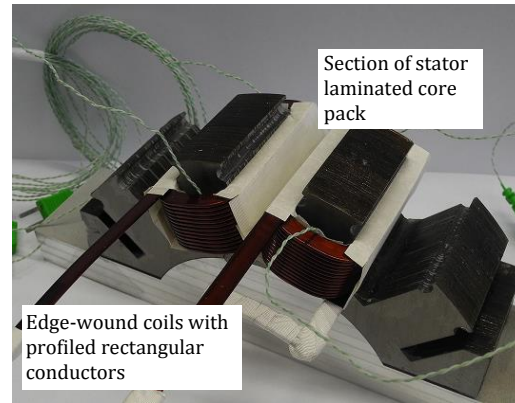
Section of the stator laminated core pack together with the edge-wound coils – motorette assembly
